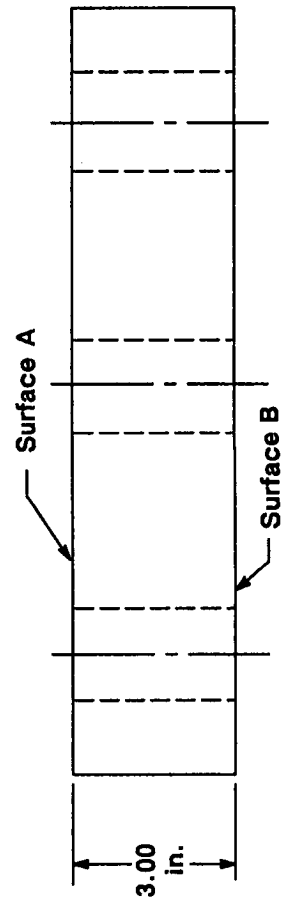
Threaded 8-Hole Aft Dome Fixture
